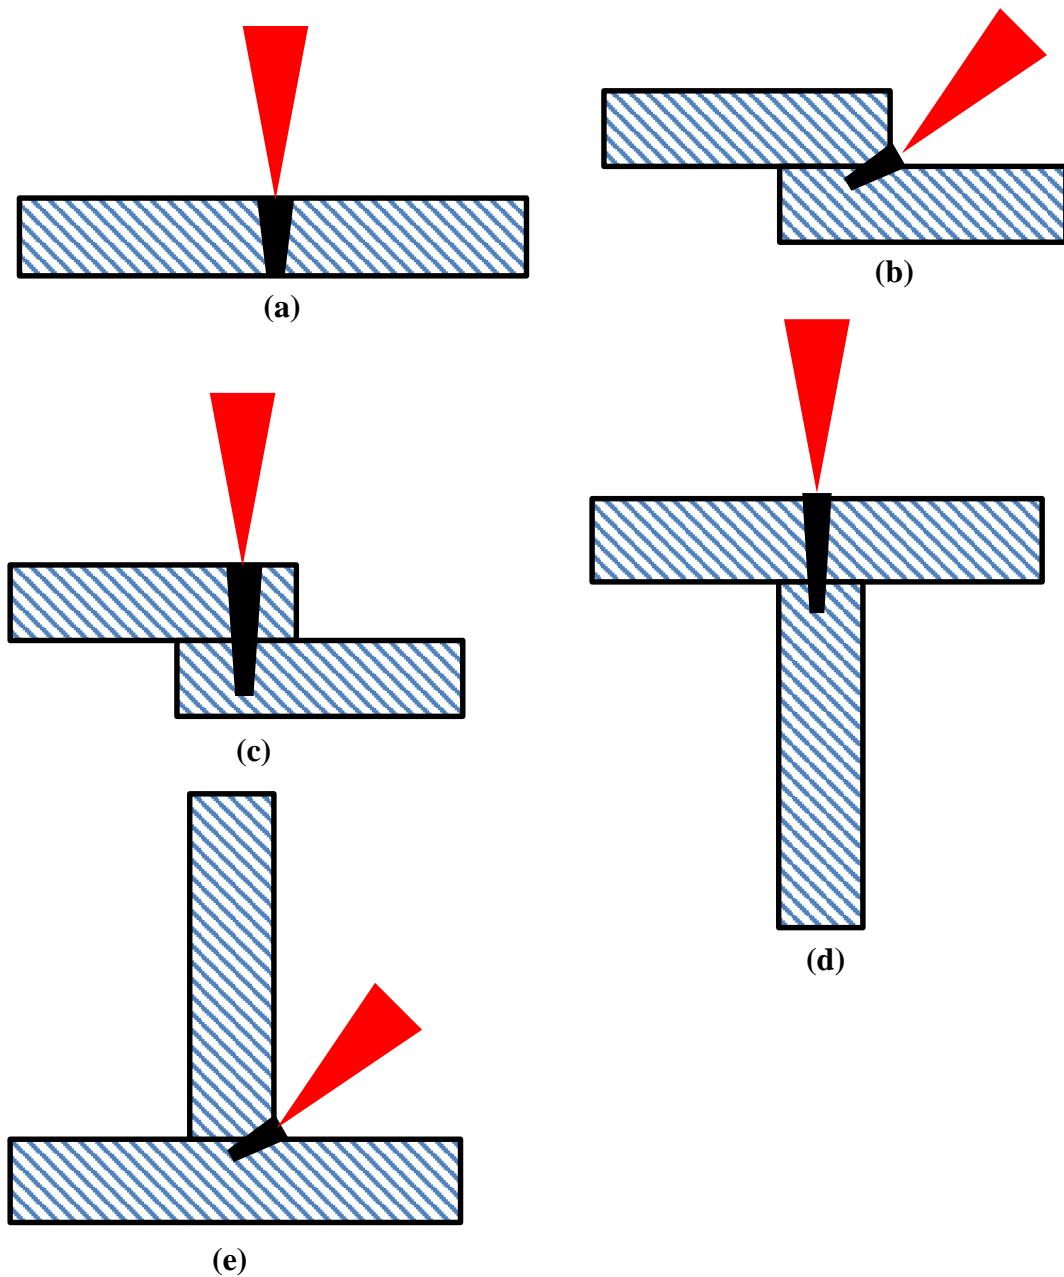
Joint Configurations: (a) Butt, (b) Lap along the seam (c) Lap through the top sheet (d) T through the top sheet and (e) T from a single side
